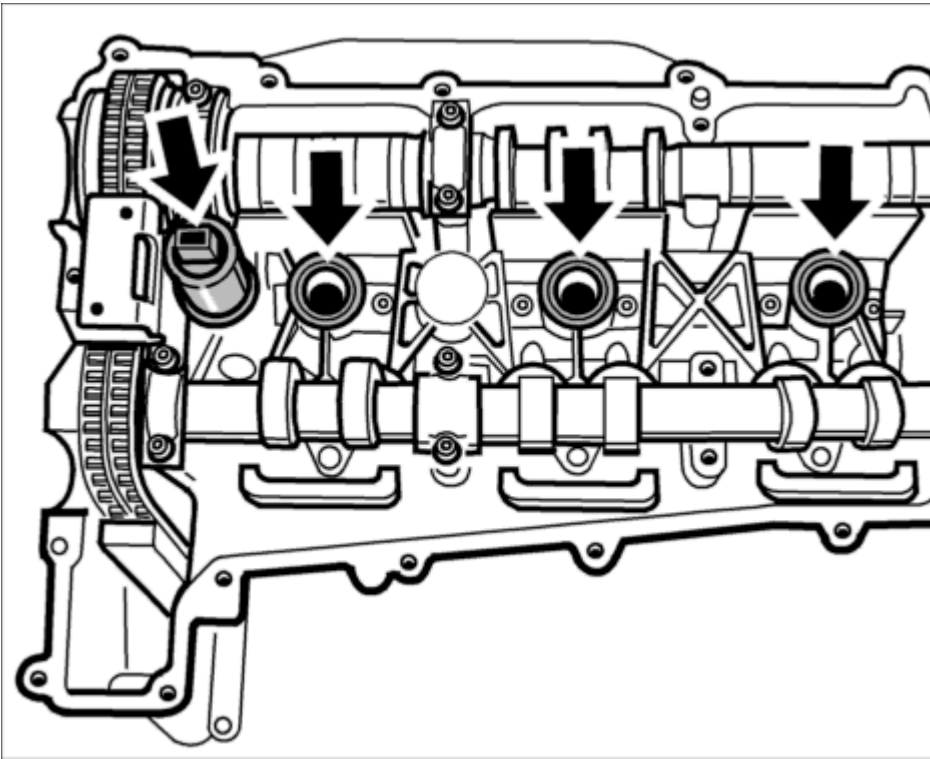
Spark plug slot seals and solenoid hydraulic valves
